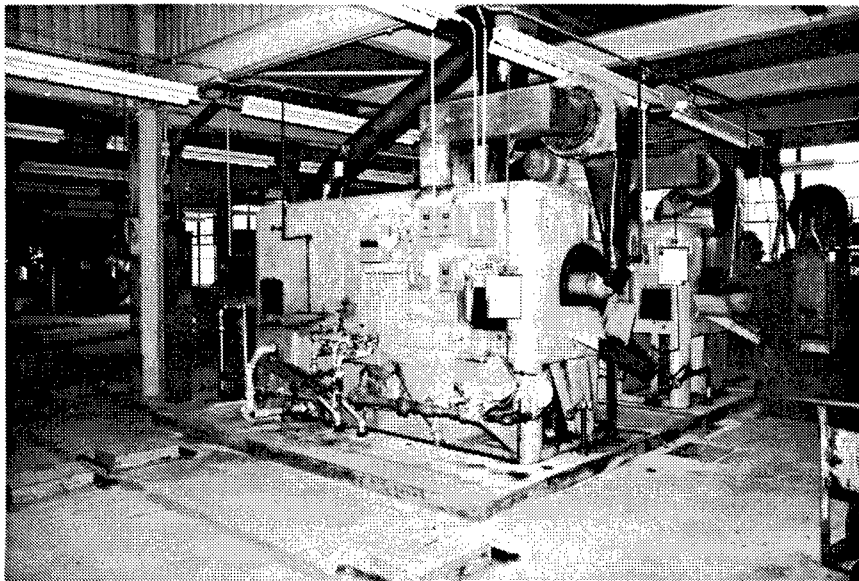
Building 102: Lube Machine manufactured in 1952 by the Cincinnati Clean and Finish Company.
